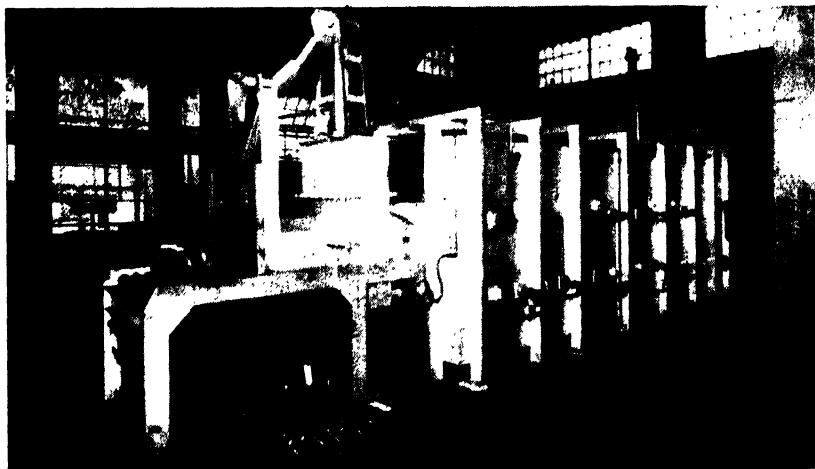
Continuous gas-fired gas-carburizing furnace at Reed Roller Bit Company. (Courtesy Surface Combustion Co.)
